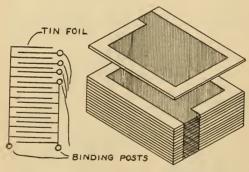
METHOD OF ASSEMBLING CONDENSER
